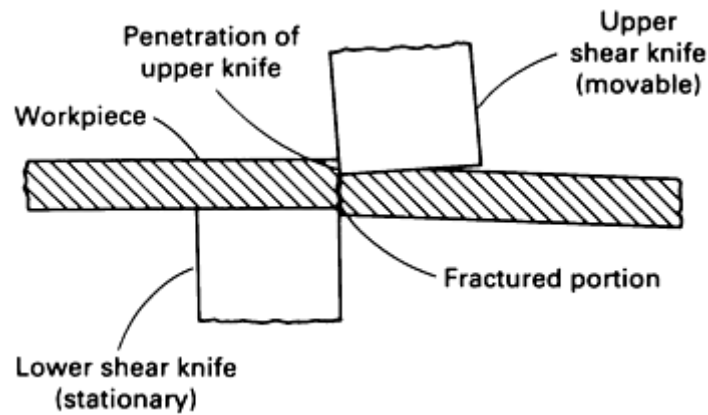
SCHEMATIC SHOWING THE MECHANISM OF STRAIGHT-KNIFE SHEARING
